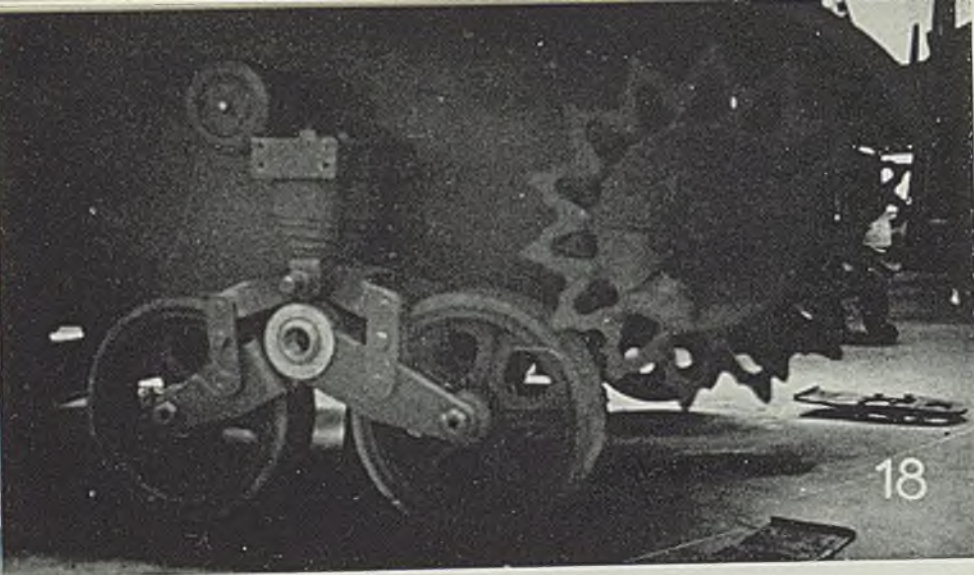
Here is the same bogie unit mounted on the tank. Also the sprocket wheels are shown mounted on the final drive units at the extreme front, or right
